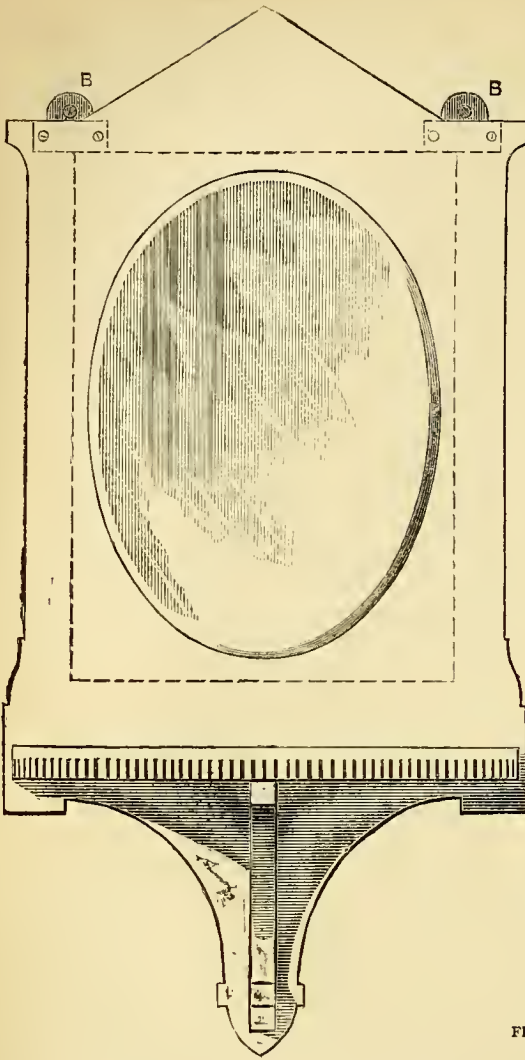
FRONT ELEVATION OF VELVET WALL BRACKET.
